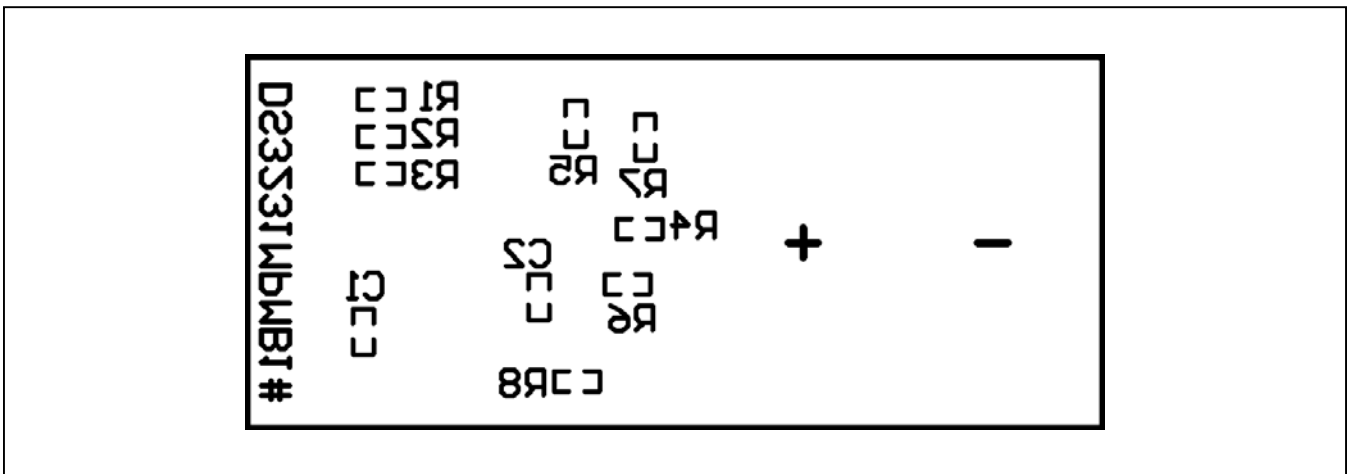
DS3231MPMB1 Peripheral Module Component Placement Guide—Solder Side
